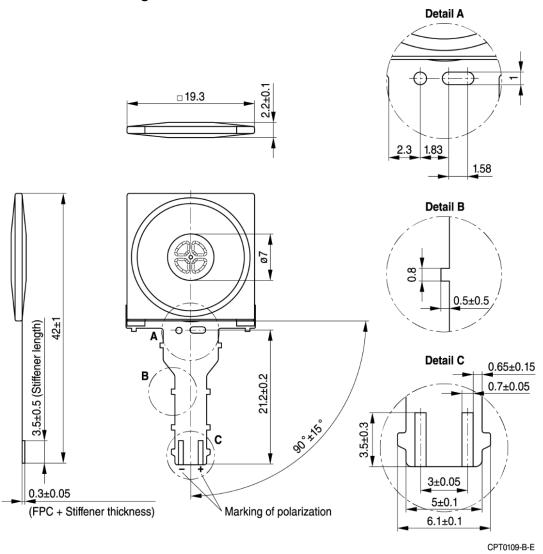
Dimensional drawings of PowerHap 1919 with FPC
